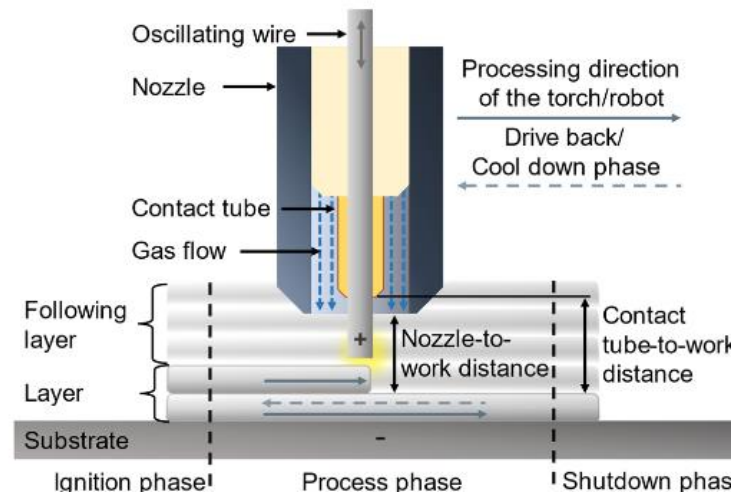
Schematic setup of welding torch setup for layer-by-layer part production [Hau + 21a].
